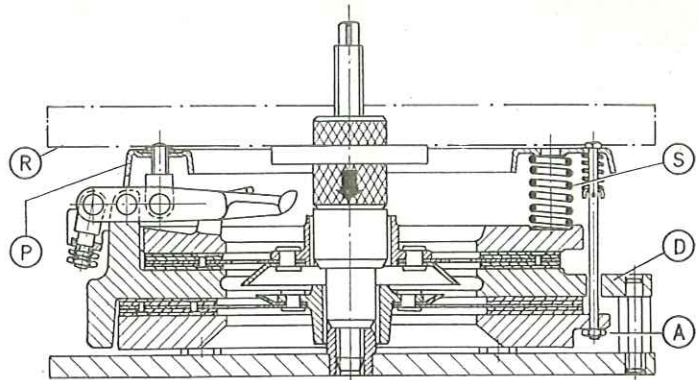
Adjusting the spring load with screws and nuts A and checking the co-planarity of disc P with respect to clutch disc D fixed to the flywheel, using steel rule R. (The arrow engraved on the fixture must be pointing downwards).
